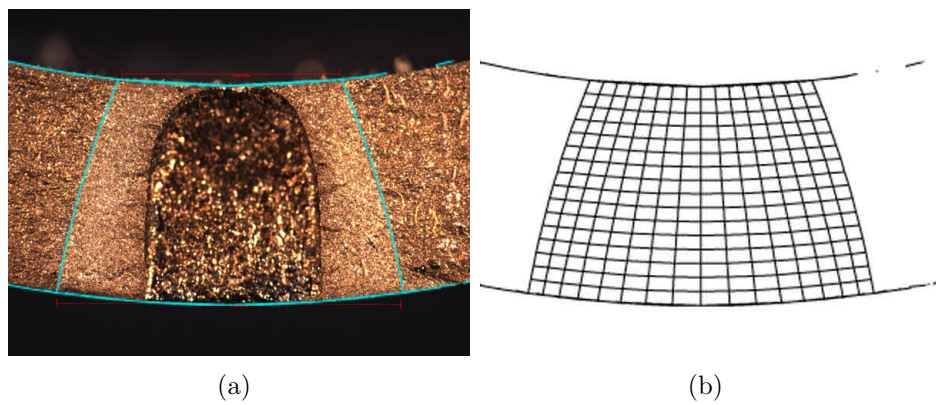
(a) Fractograph with BEM geometry superimposed and (b) BEM mesh of pre-crack for specimen N04.
